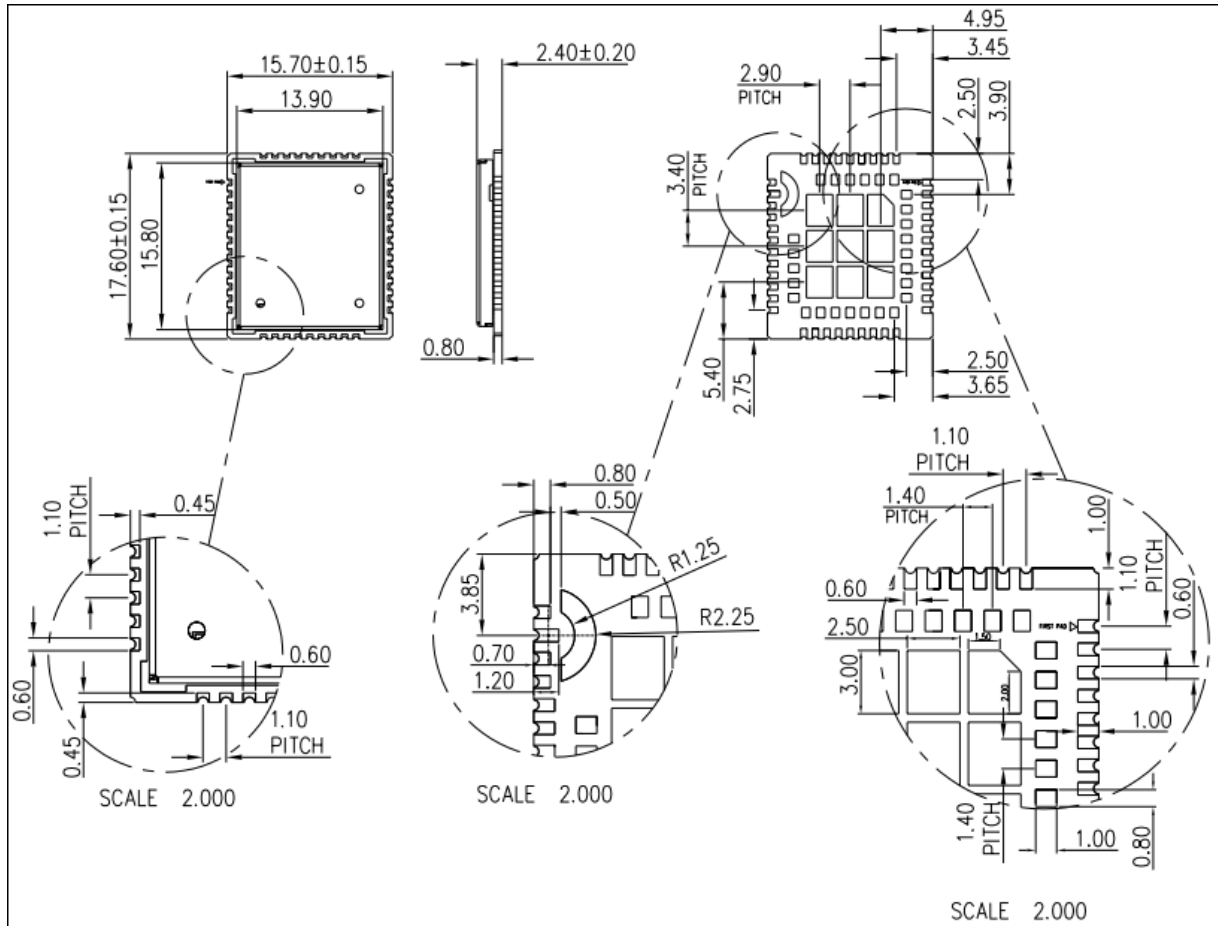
Dimensions of SIM800C-DS (Unit: mm)
